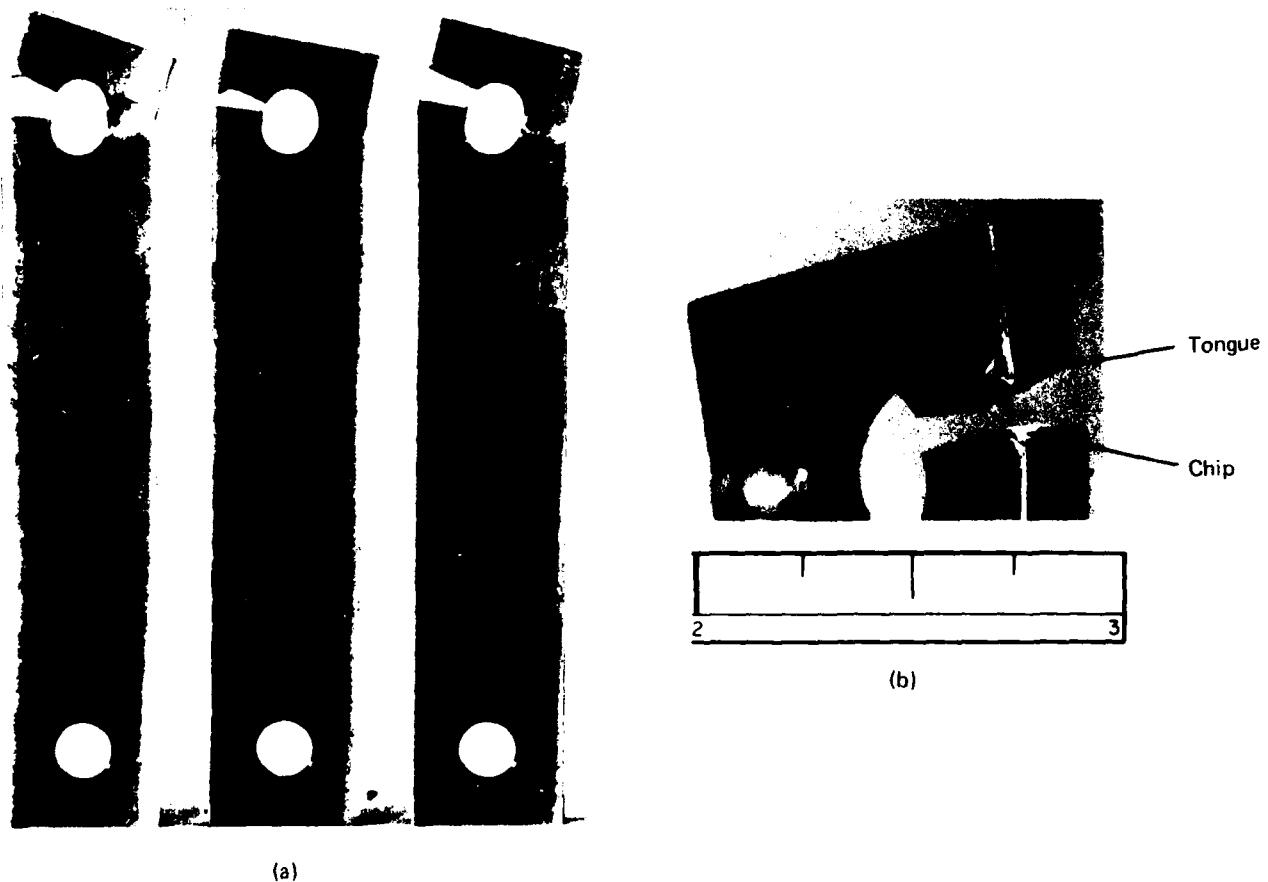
LT fretting fatigue specimens (a) showing enlargement of fracture surface (b).
